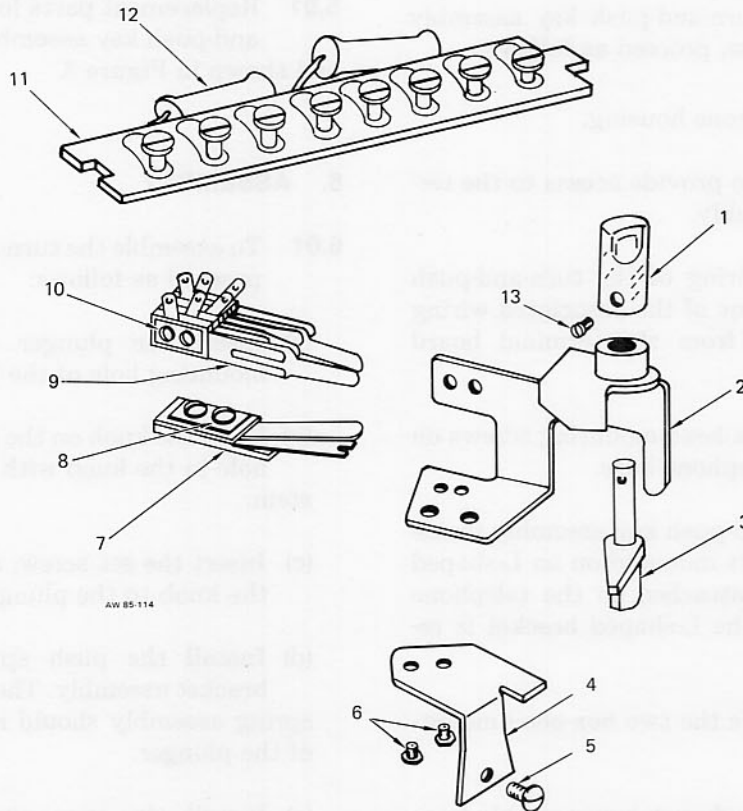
Model 79453 Turn-And-Push Key Assembly, Exploded View
